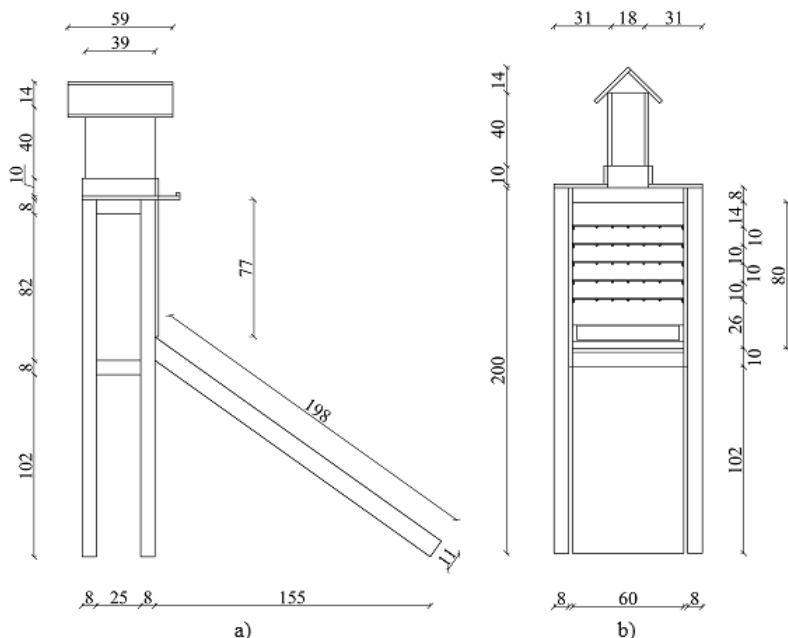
Dimensions of the dryer: a) side view; b) back view
